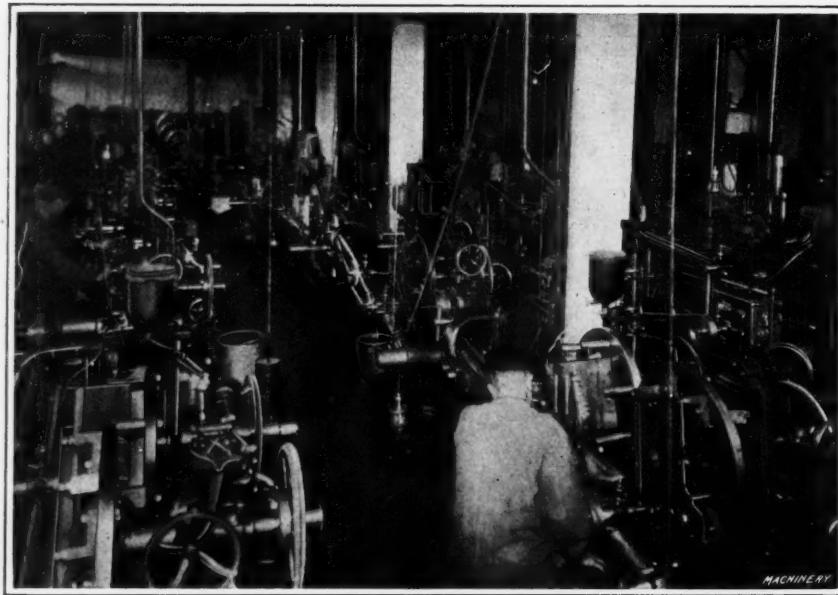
Reducing Machines in Operation at Plant of Keller Mechanical Engraving Co.
